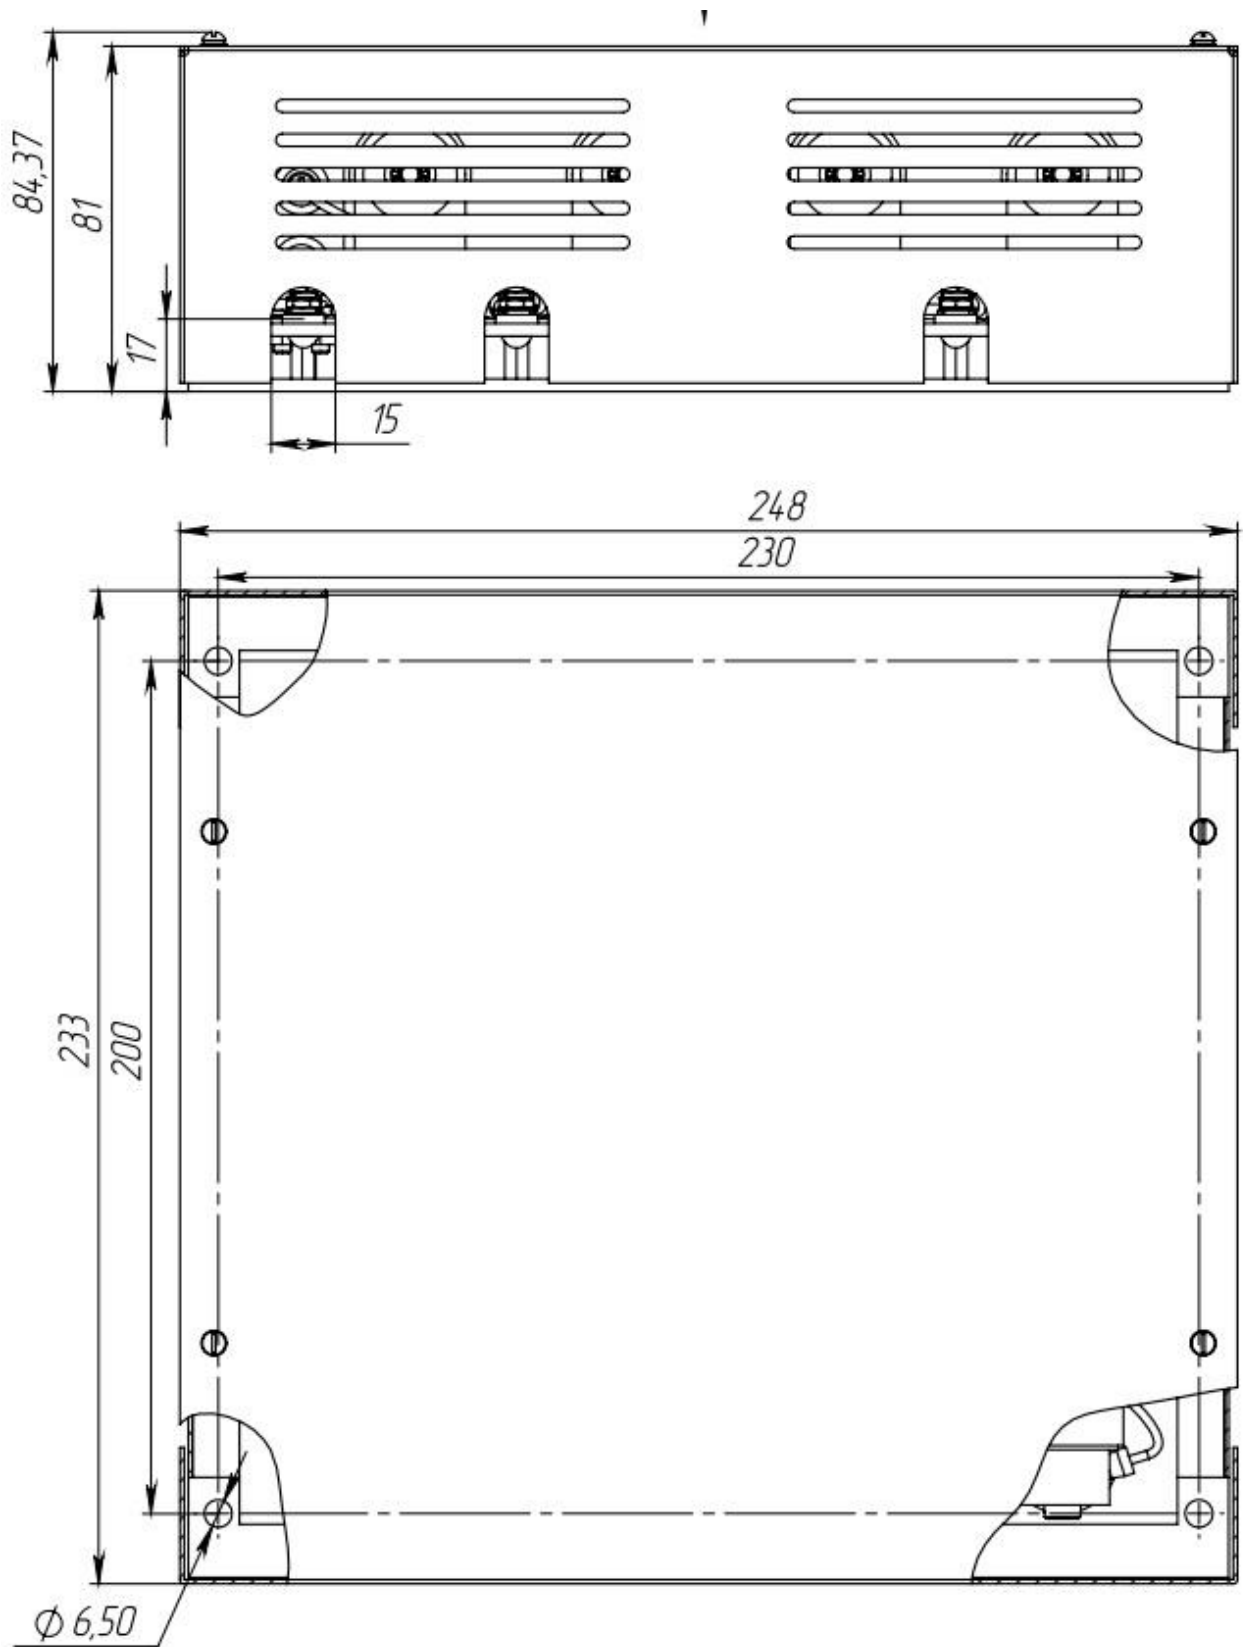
Overall and mounting dimensions of PSU, design versions 3000/65 V and 1500/65 V
